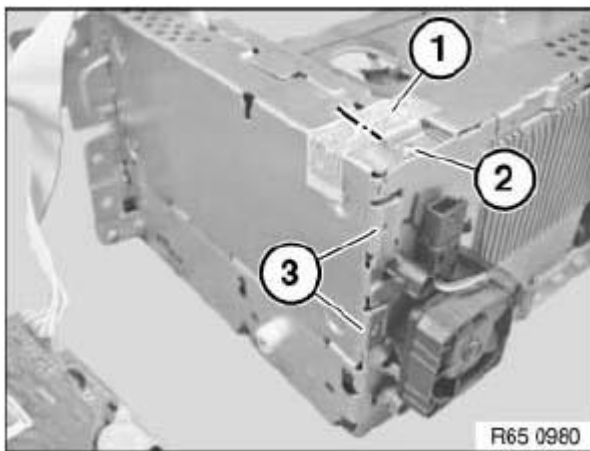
Identifying Warranty Seal, Screw And Side Cover Out Of Mounting
